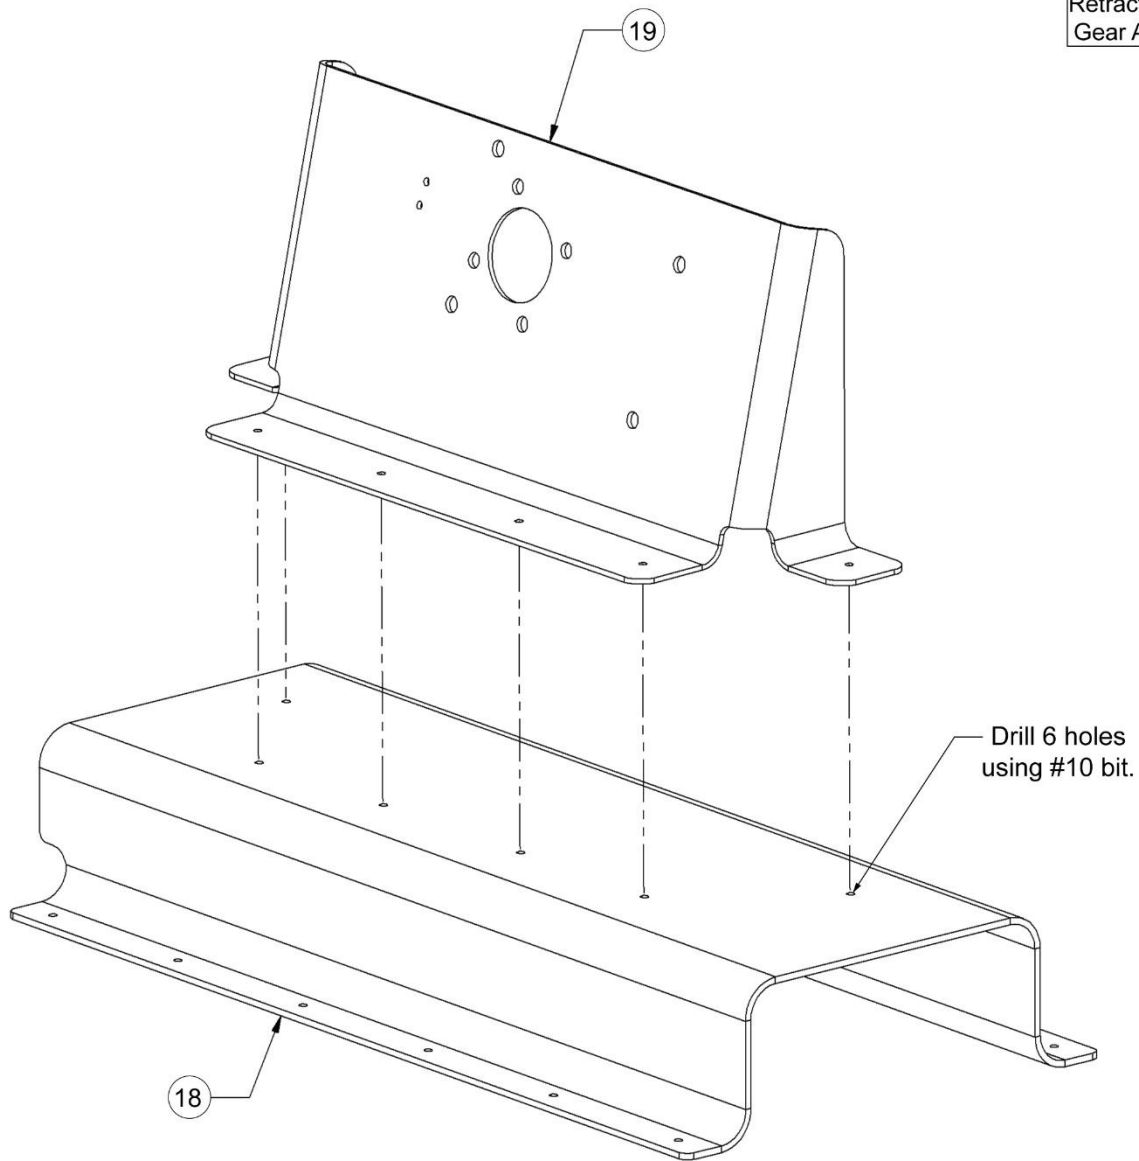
Drilling Holes for Pitch Servo Riser Bracket
